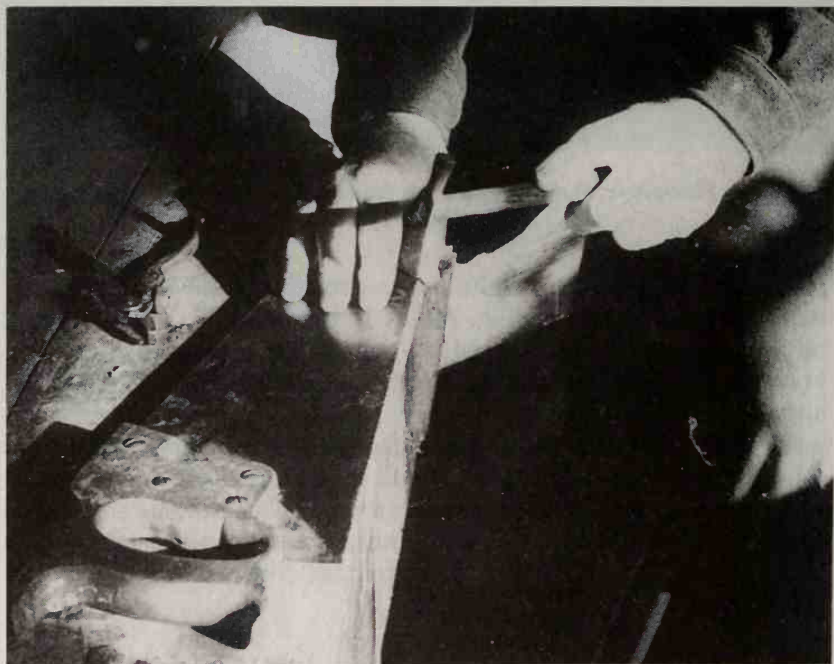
Setting saw teeth with a hammer over the edge of an iron block.
